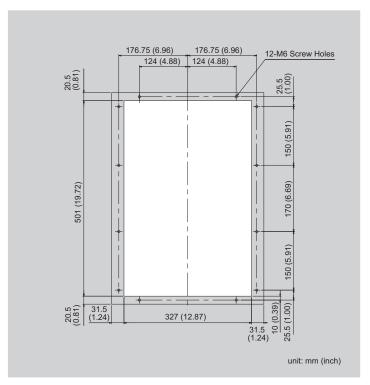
Panel Cut-Out Dimensions (CIMR-A□4T0088U, 0103U)
